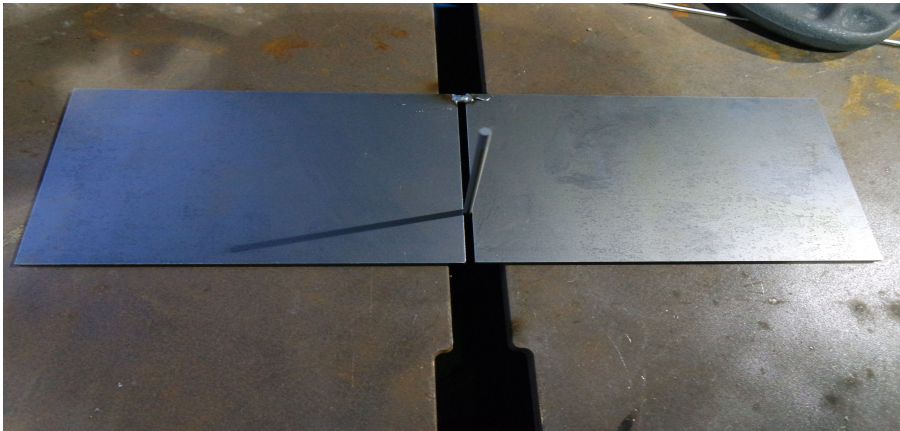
Tack welding & 3.2mm Gap
